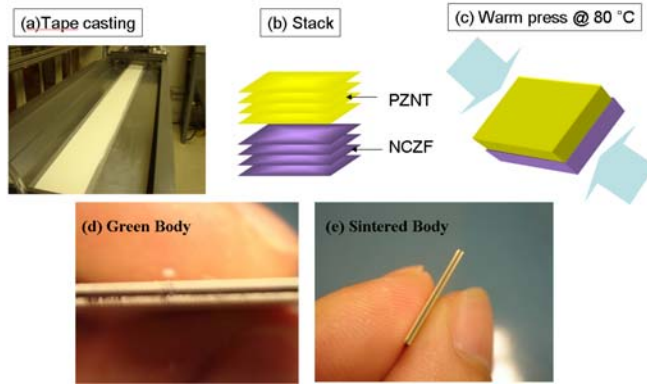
Tape casting processing: (a) casted tape, (b) stacking, (c) warm pressing, (d) green body, (e) sintered sample.
